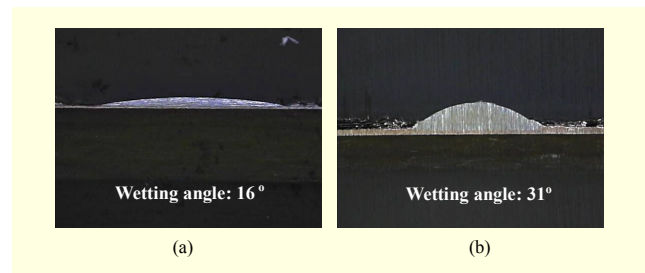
Wetting angles of the Sn-58Bi solder ball within the resin on (a) Au and (b) Cu finish electrodes.
